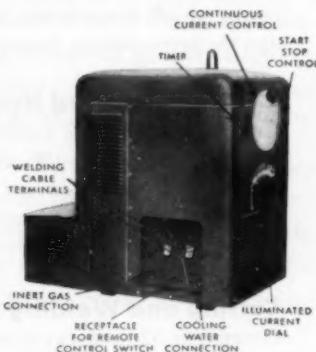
Simple to install. Connections for welding cable terminals, cooling water and inert gases are housed in recess at side of machine. Illuminated current dial indicates when welder is turned on.
